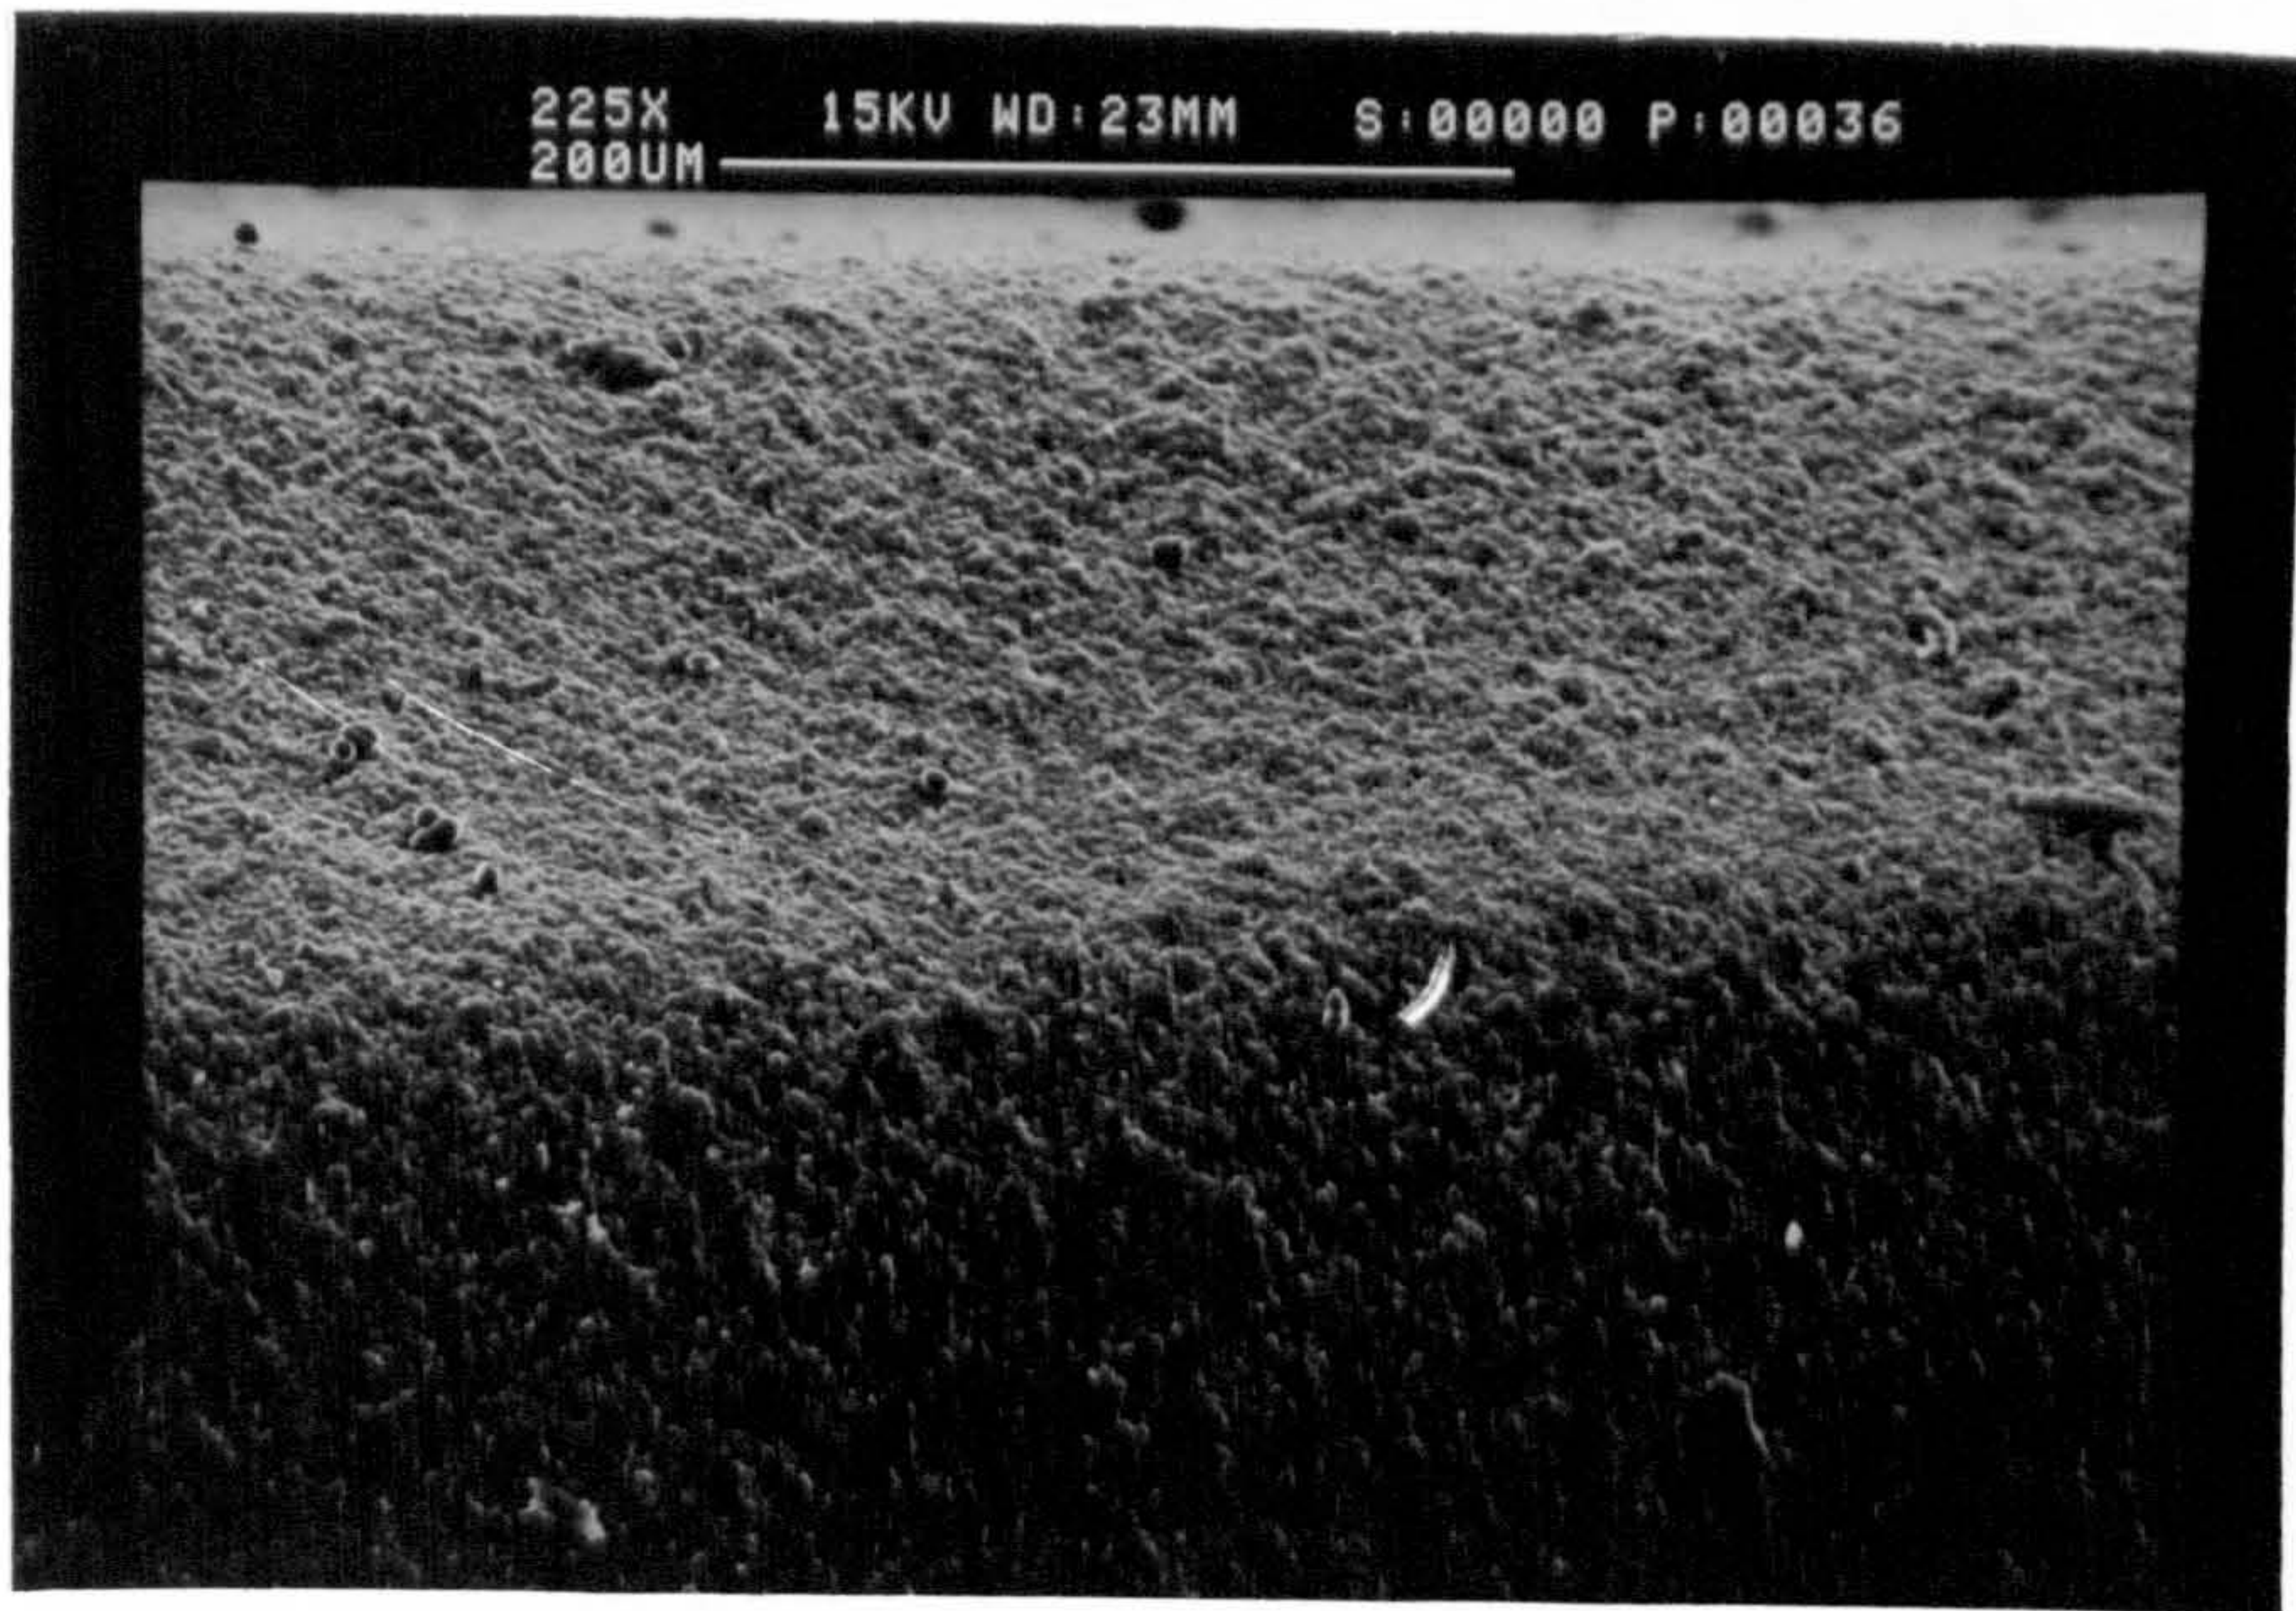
Magnified view of flank wear land near the cutting edge (P10 carbide tool)
